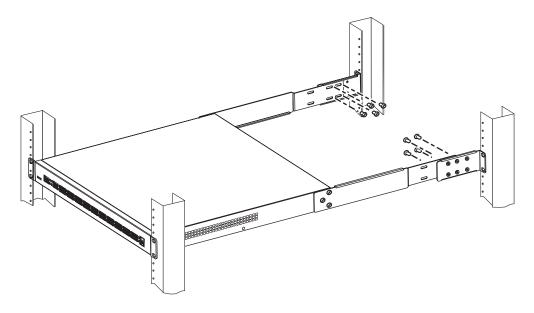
Four-post Rack-mounting with Adjustable Rear-mounting Brackets
